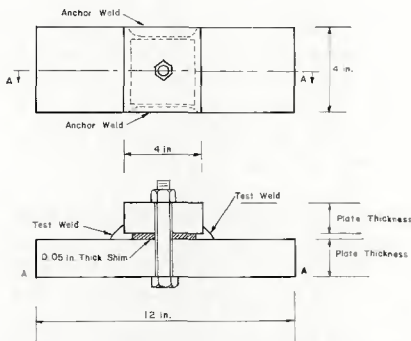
The form of the CTS test used in the welding tests
